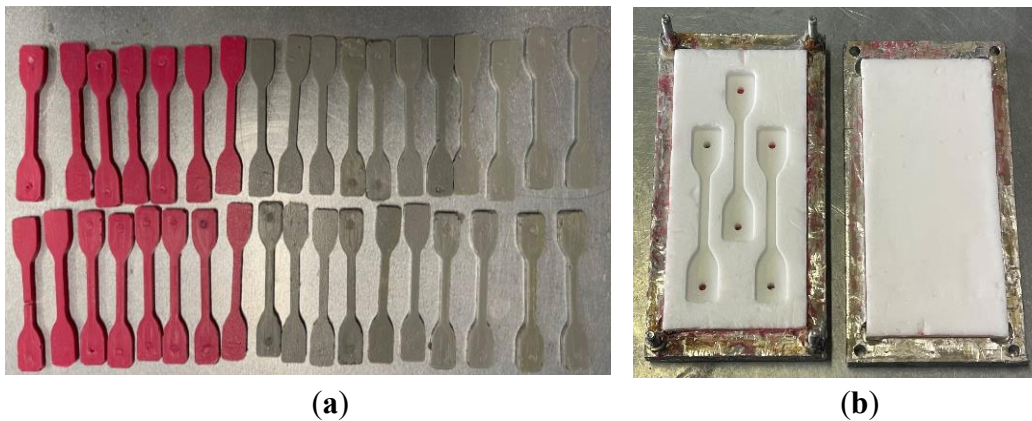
(a) Adhesive bulk specimens; (b) dogbone Teflon mold.
